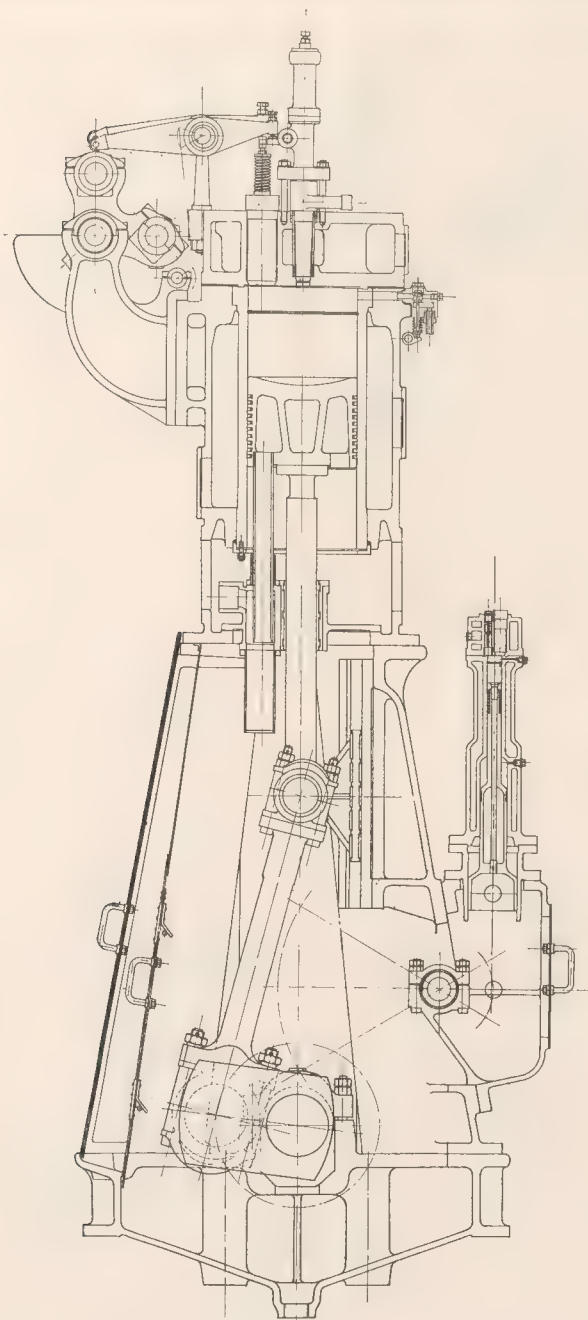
Six-Cylinder Werkspoor Marine Diesel Engine of the "Vulcanus", 450 B.H.P. Cylinder Diameter = 400 MM.; Stroke = 600 MM.
